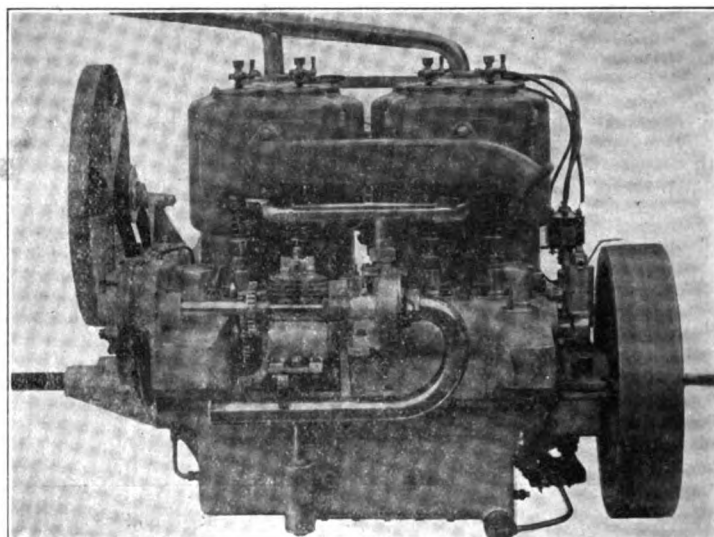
CAM SHAFT DRIVEN TIRE PUMP ON COLUMBIA ENGINES
